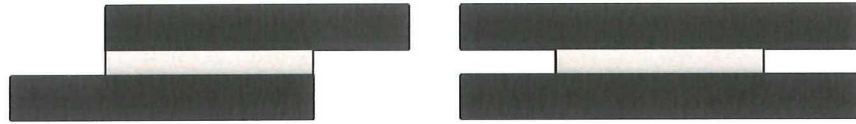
Left: welding interface where ED has two free edges (single lap shear sample has four free edges); right: welding interface where ED has no free edges.
